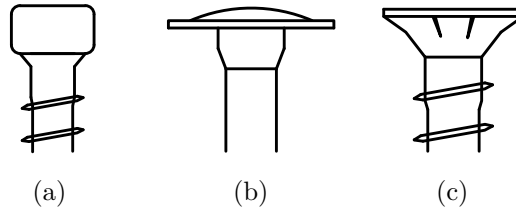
Head type: (a) cylindrical (b) flange (c) countersunk.
